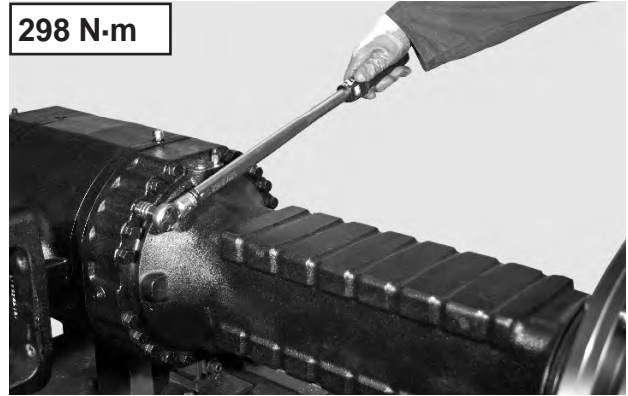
Check the flatness of the arms, using tool T2 (See drawing T2 p. 54); then lock the arms into their final position, using screws adequately coated with Loctite 242.
